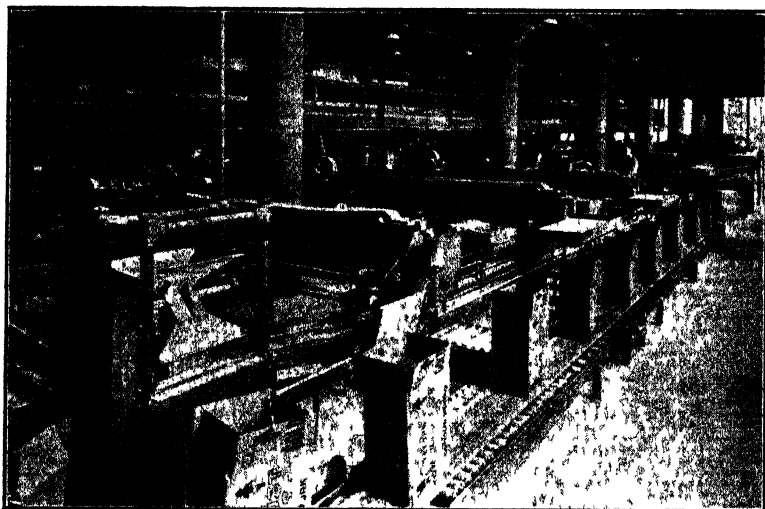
Packing department of the Gold Dust Corporation showing reinforced concrete building, flat-slab construction. The packages are filled in the machines shown in line at the left, fed from storage by the belt conveyor running above. Another machine places the packages in cartons and delivers the cartons to a conveyor which carries them to a machine that closes and seals them and drops them into the spiral gravity chute which leads to the shipping and storage departments on the first and second floors. This picture illustrates the importance of proper column spacing and structural proportions to allow space for the efficient arrangement of equipment. (Courtesy of Lockwood Greene Engineers, Inc.)
